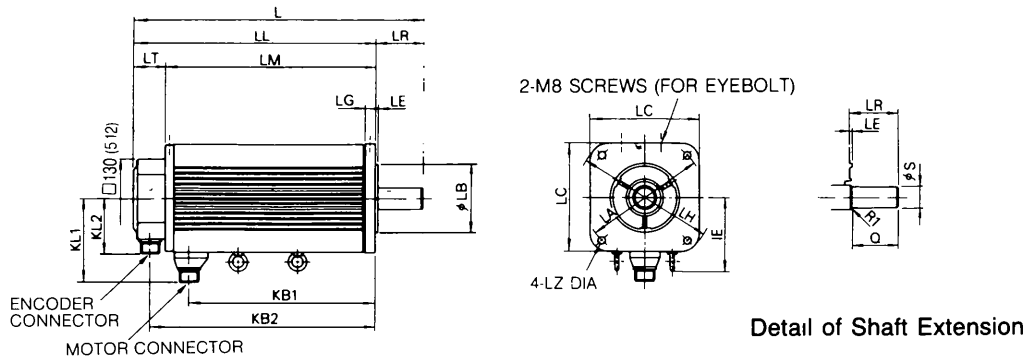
USAGED-05LS1, -09LS1 (Taper Shaft), -13LS2 (Straight Shaft)
